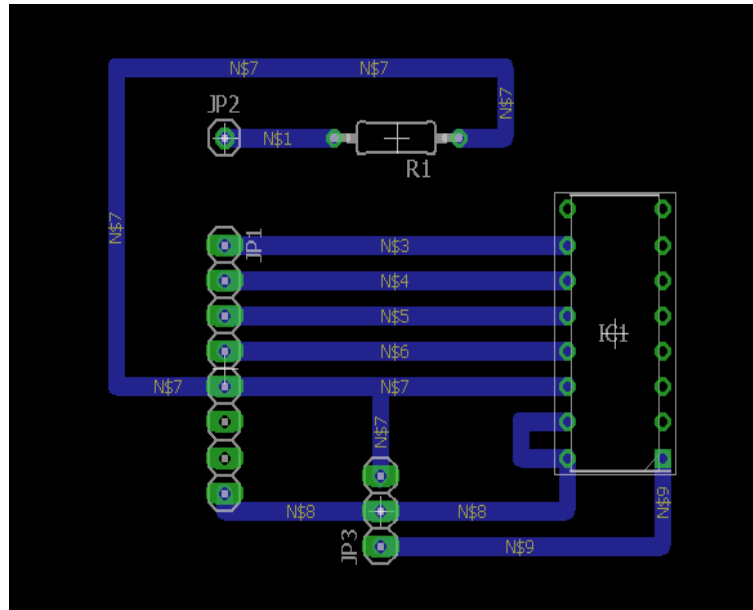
Printed circuit board layout of sound and thermistor sensors.
